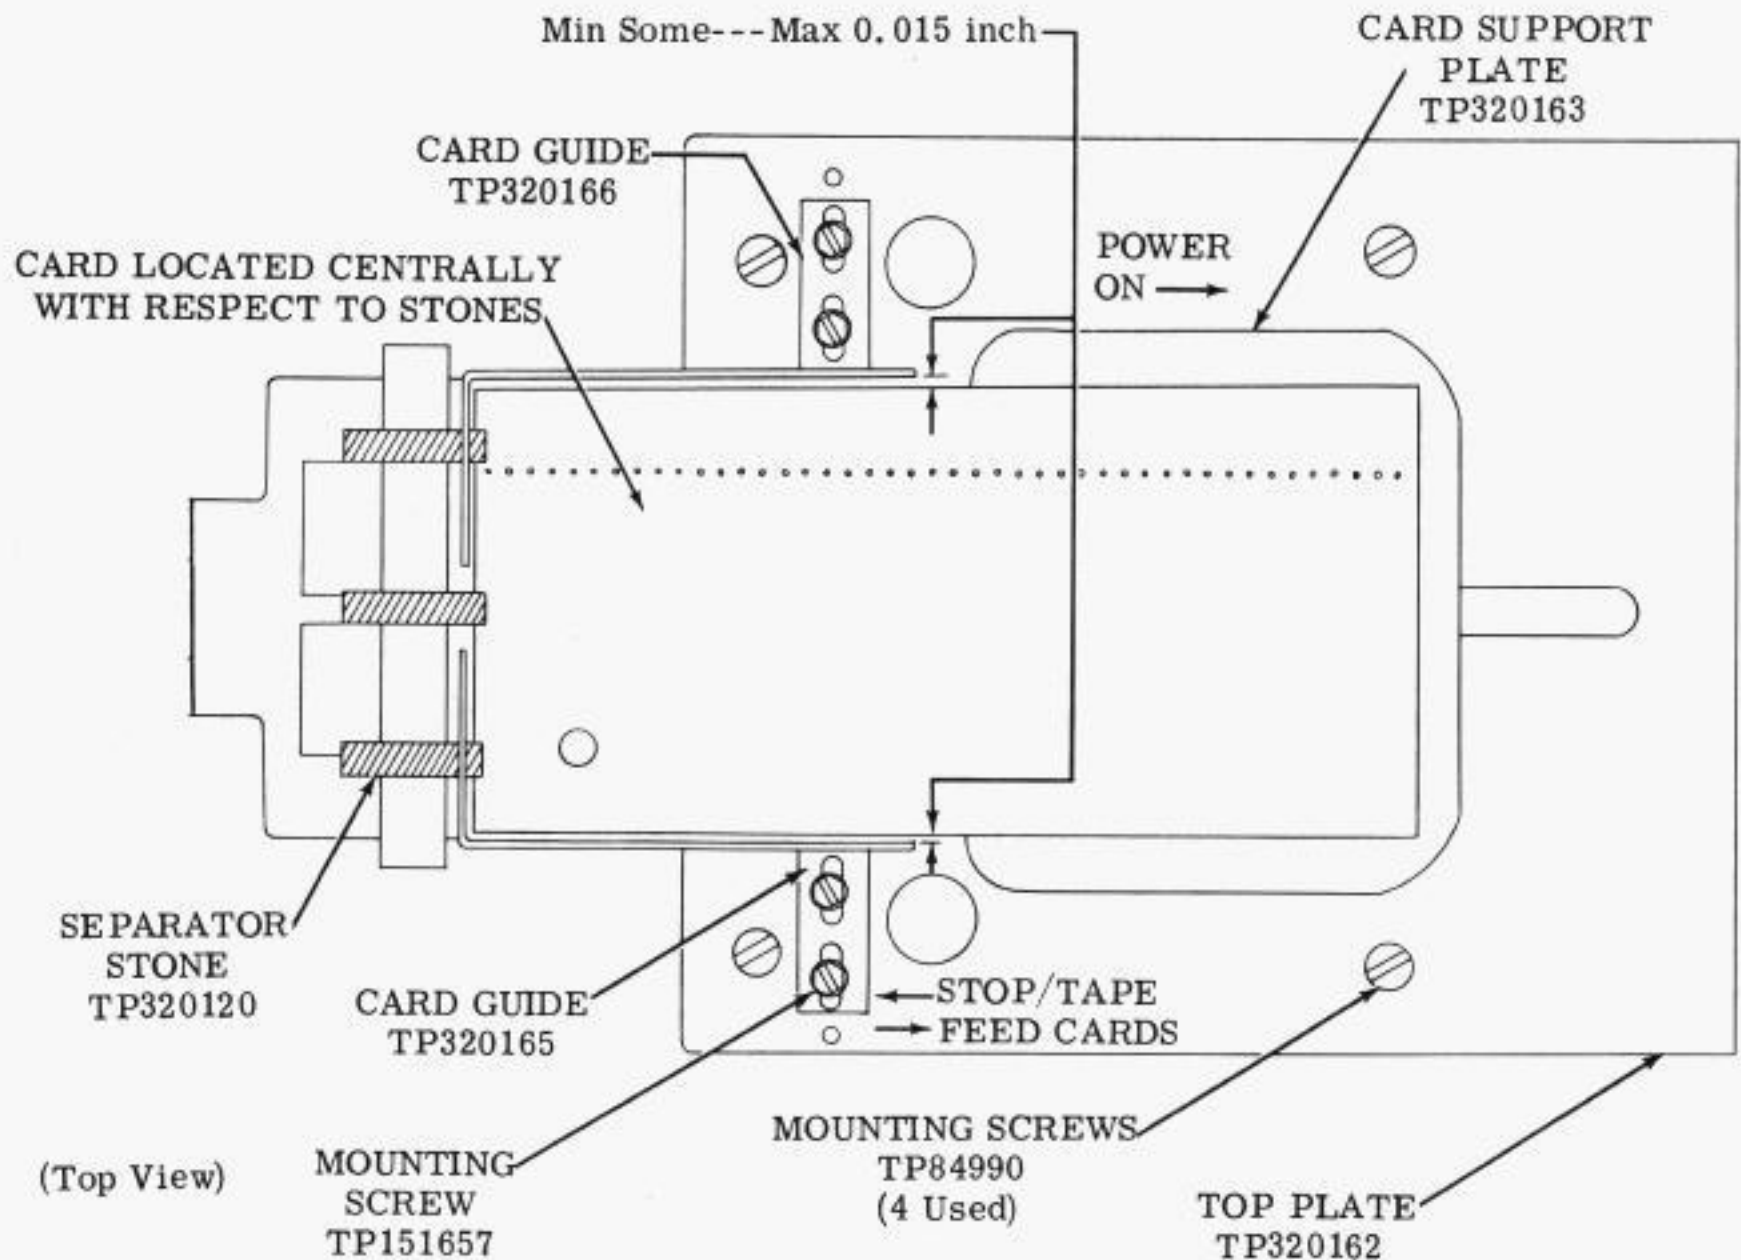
Feeder Top and Card Support Plate and Card Guides
